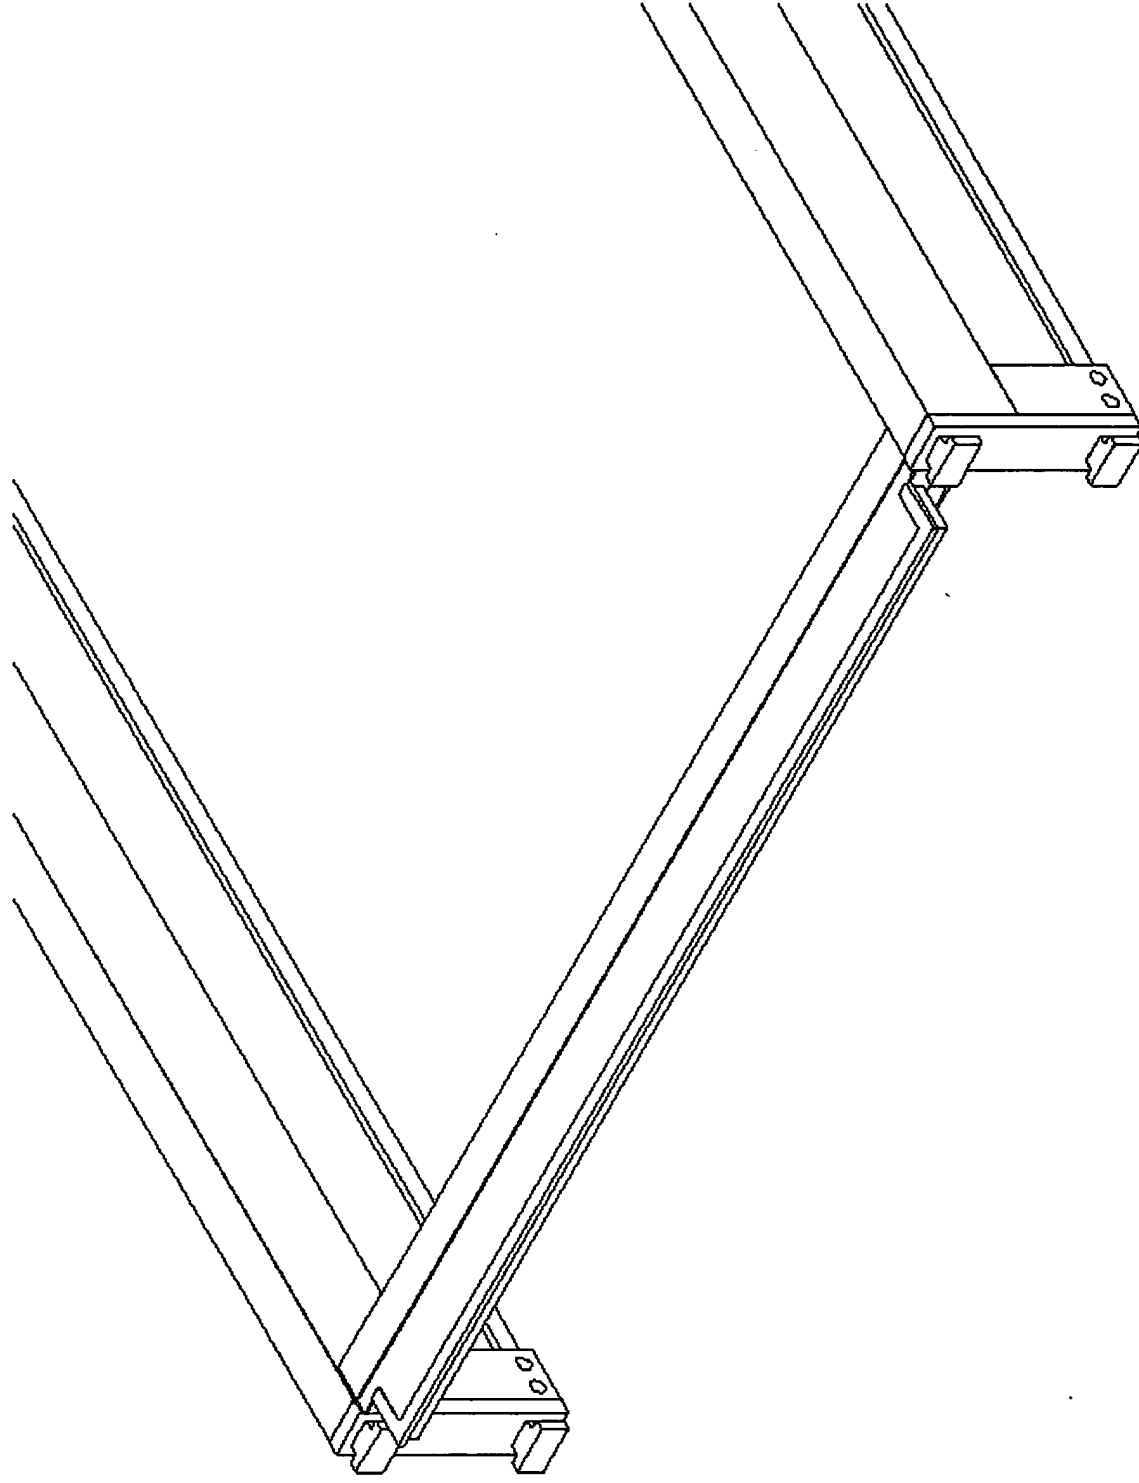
B: Isometric view of the right end of a ceiling frame (40 foot high cube collapsible cargo container)
